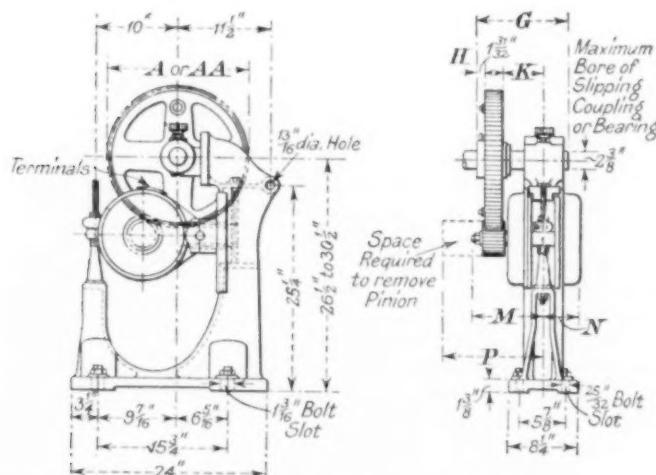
STANDARD LOOM MOTOR WITH GEAR DRIVE (1/4 TO 1 1/4 HP.)
